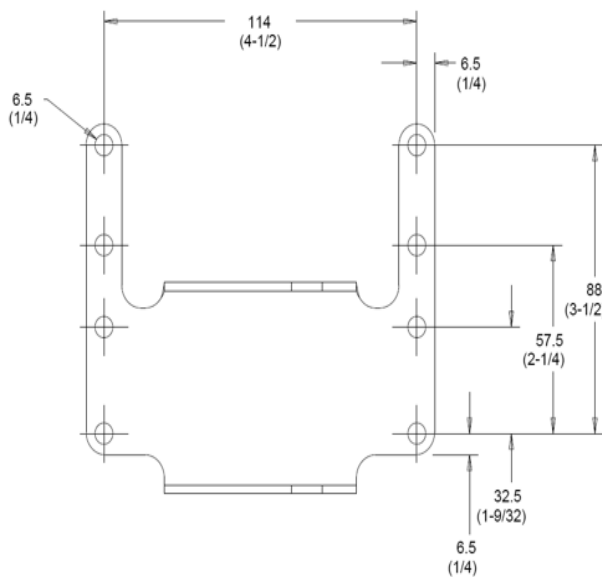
Hole patterns in mounting brackets with dimension, mm (in.)
